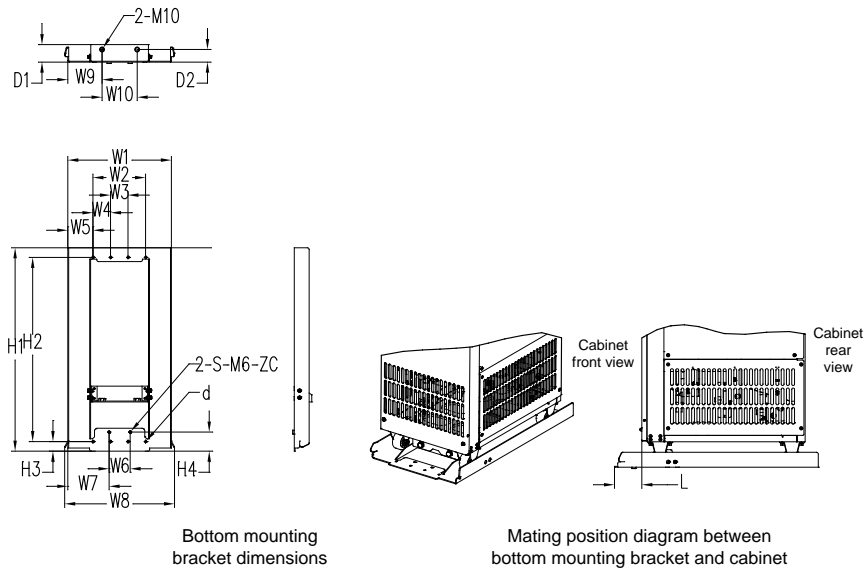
Cabinet bottom mounting bracket dimensions and installation for VFDs in T10–T12 frames
